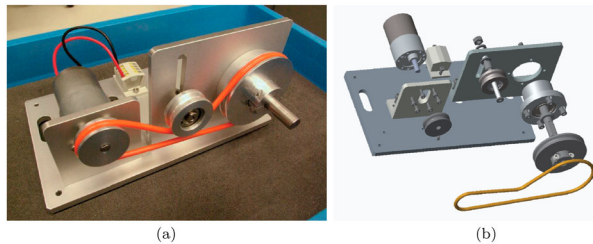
Belt drive unit. (a) Assembled; (b) Exploded diagram.
